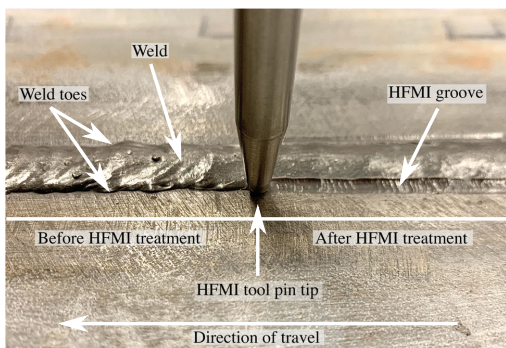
Weld seen before and after HFMI treatment. It is observed how the treatment has plastically deformed the weld toe into a smooth path, removing sharp notches
